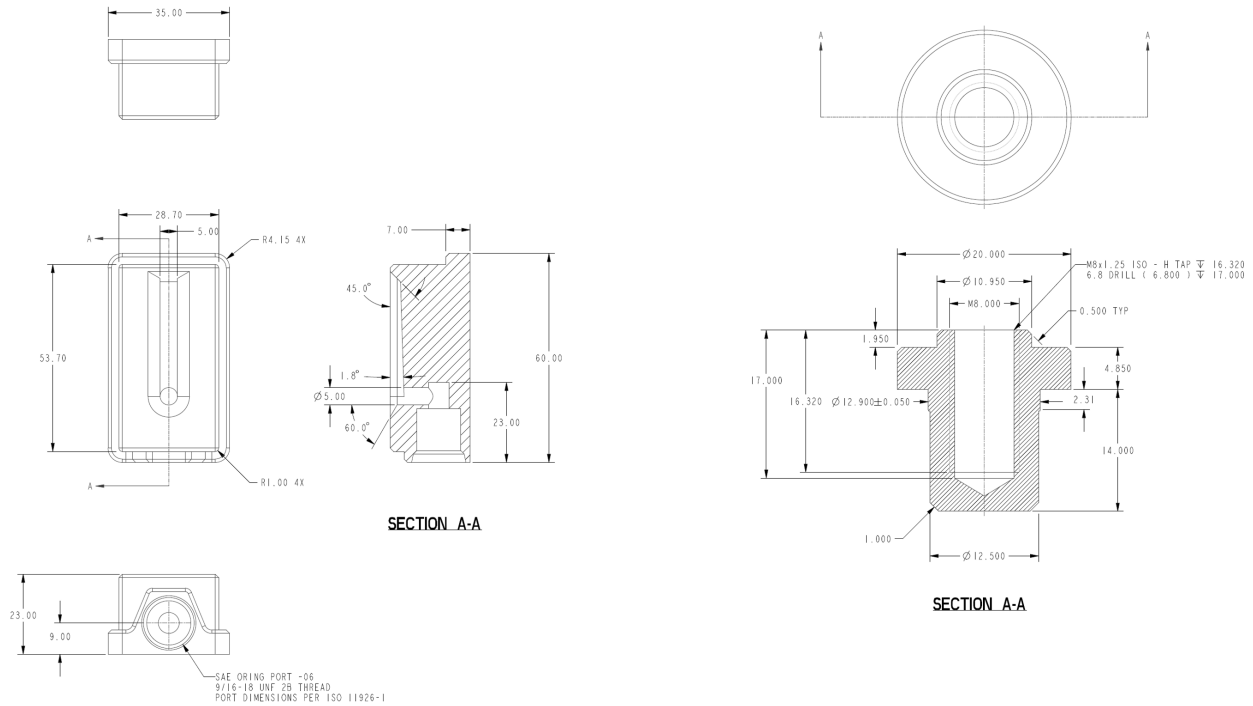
MGX Rack Manifold Drawing – Port and Cap
